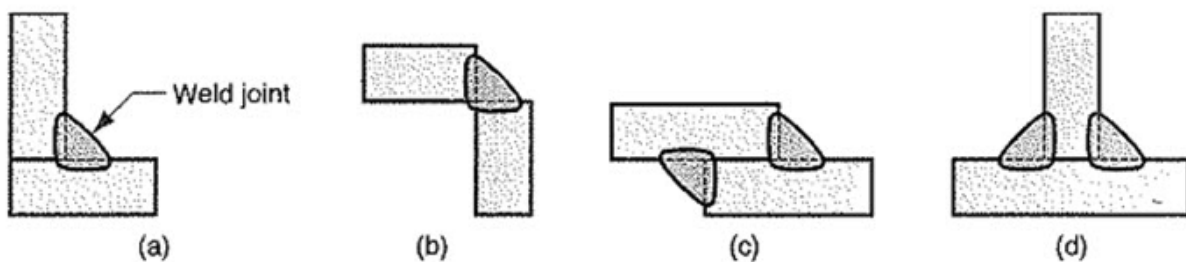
Various forms of fillet welds: (a) inside single fillet corner joint; (b) outside single fillet corner joint; (c) double fillet lap joint; and (d) double fillet tee joint. Dashed lines show the original part edges.
